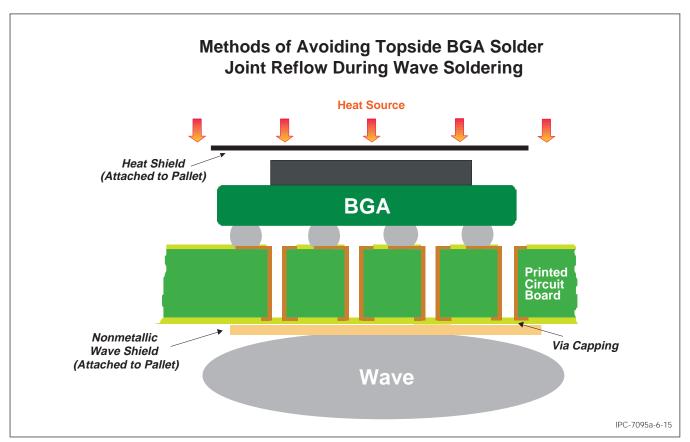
Methods of Avoiding BGA Topside Solder Joint Reflow
